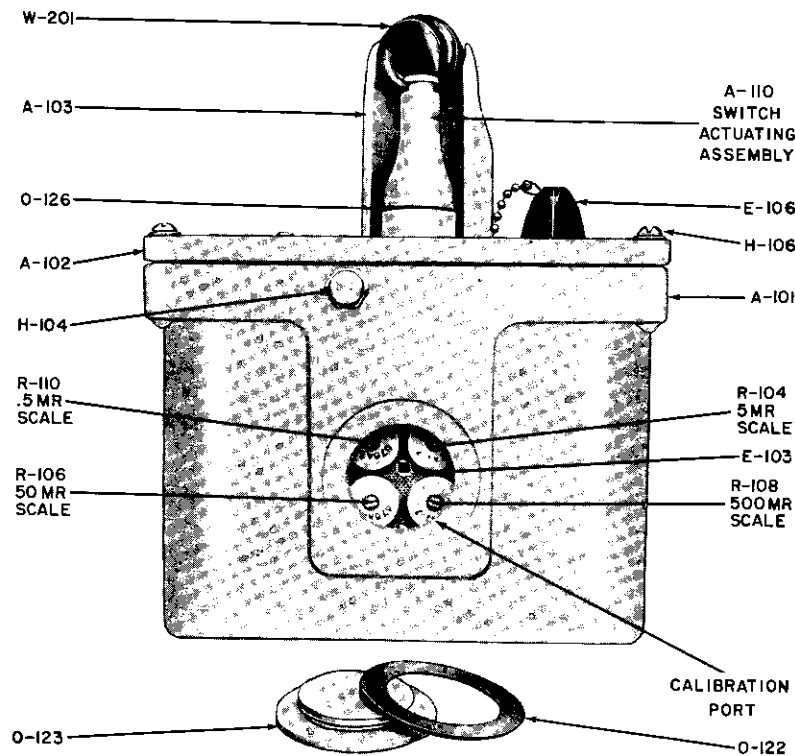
Radiacmeter IM-85/PDR-27F. Showing Calibration Port and Switch Actuating Assembly
